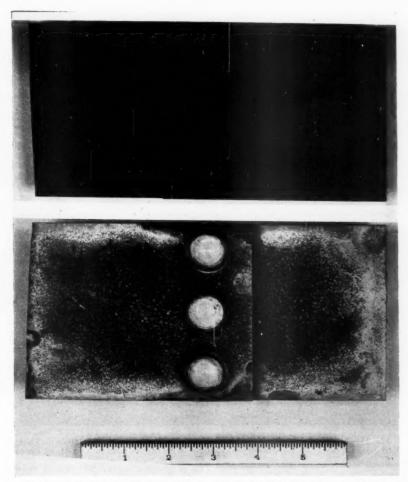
Top and Bottom Surfaces of a Riveted Extruded ZK60A Magnesium Specimen, 0.25 in. Thick, After Being Exposed to Rural Atmospheric Conditions for a Period of 1 yr.
